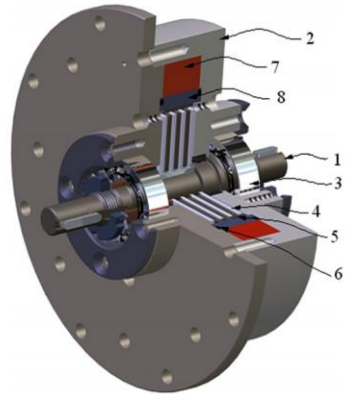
Cut-out geometry of damper: 1. Cylindrical rotor, 2. Ferromagnetic thin-walled cylinder, 3. Magnets, 4. Ball bearings, 5. Shaft, 6. Stator, 7. Rectangular frame, 8. Coil. [92]
